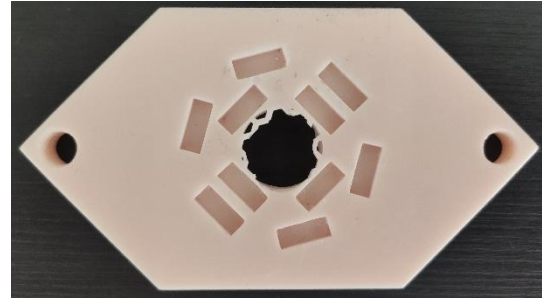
Backplate prototype II: With newly designed rectangular holes for larger, stronger magnets. The middle has been drilled out.
